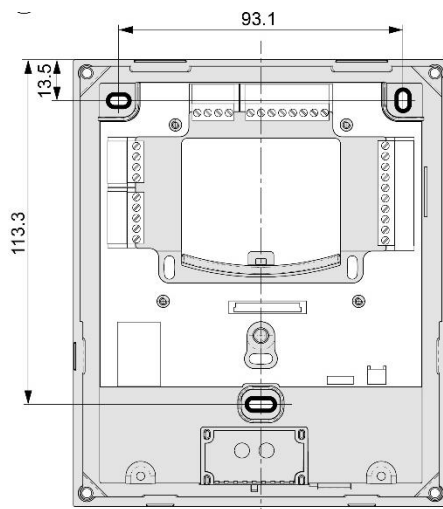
Surface mounting without flush-mounted box (measurements in mm)
